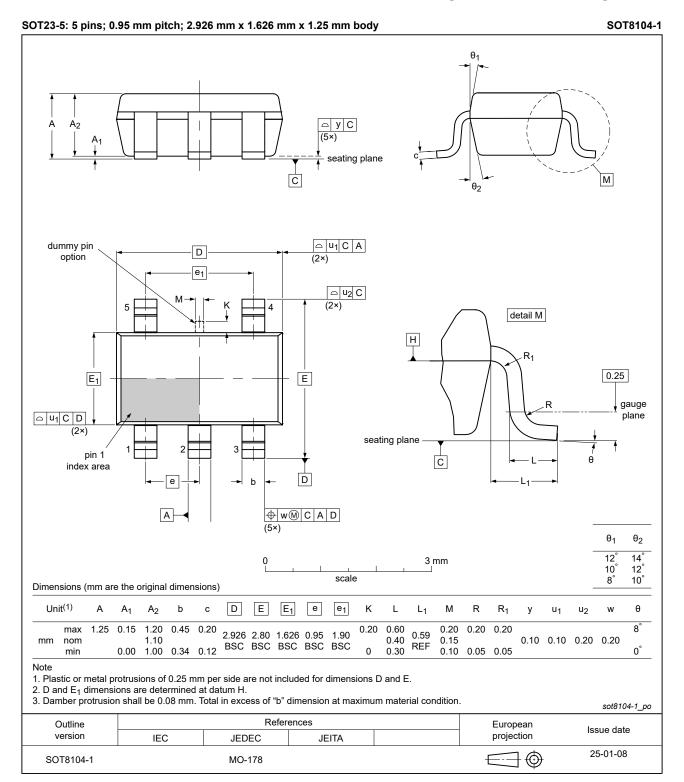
Package outline SOT8104-1 (SOT23-5)
